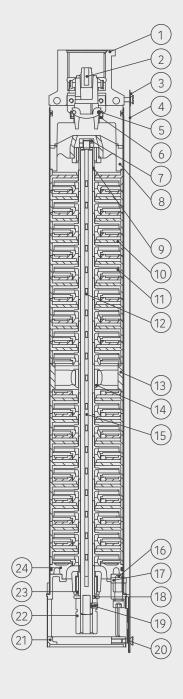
Cross-section view of 4 inch Submersible Motor: 1 – 5 HP
